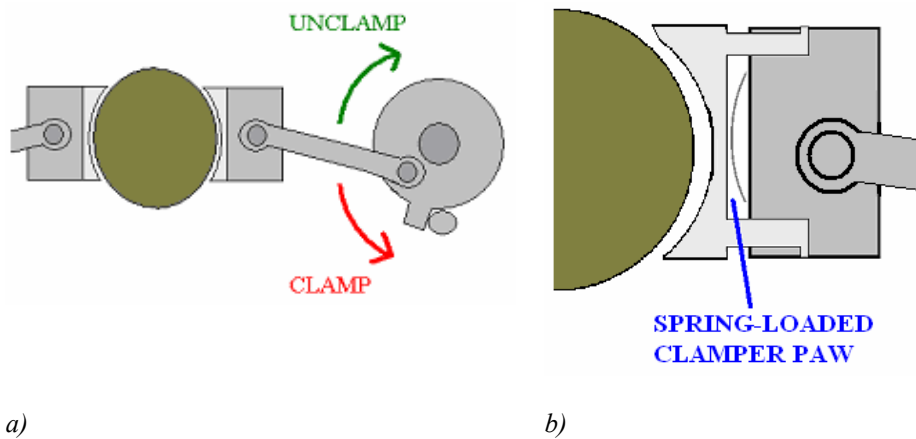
Clamper concept. In figure a): A mechanical dead stop position of the clampers' over-center-mechanism. In figure b), a spring-loaded clamper paw instead of elastic rubber-like material in the friction pad (Image: MA).
